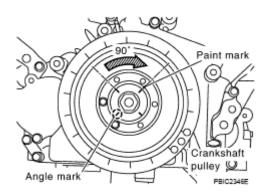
Identifying Paint Mark On Crankshaft Pulley Courtesy of NISSAN MOTOR CO., U.S.A.
